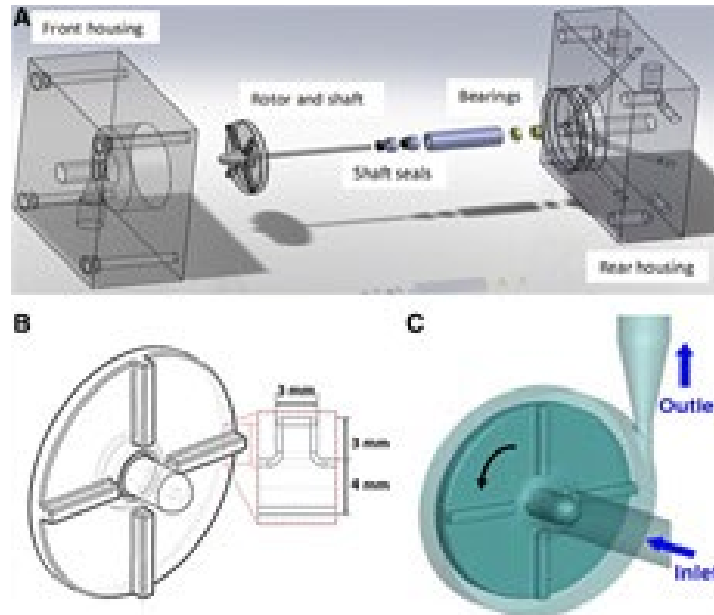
A: Assembly drawing for FDA benchmark pump model. B: Enlargement of rotor showing dimensions of rounded blade edges. C: Computer model of pump.
